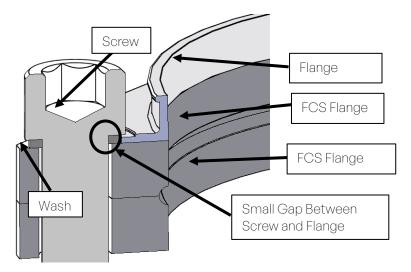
Cross-section view of Flange Adapter, washer, screw, and FCS Flange
